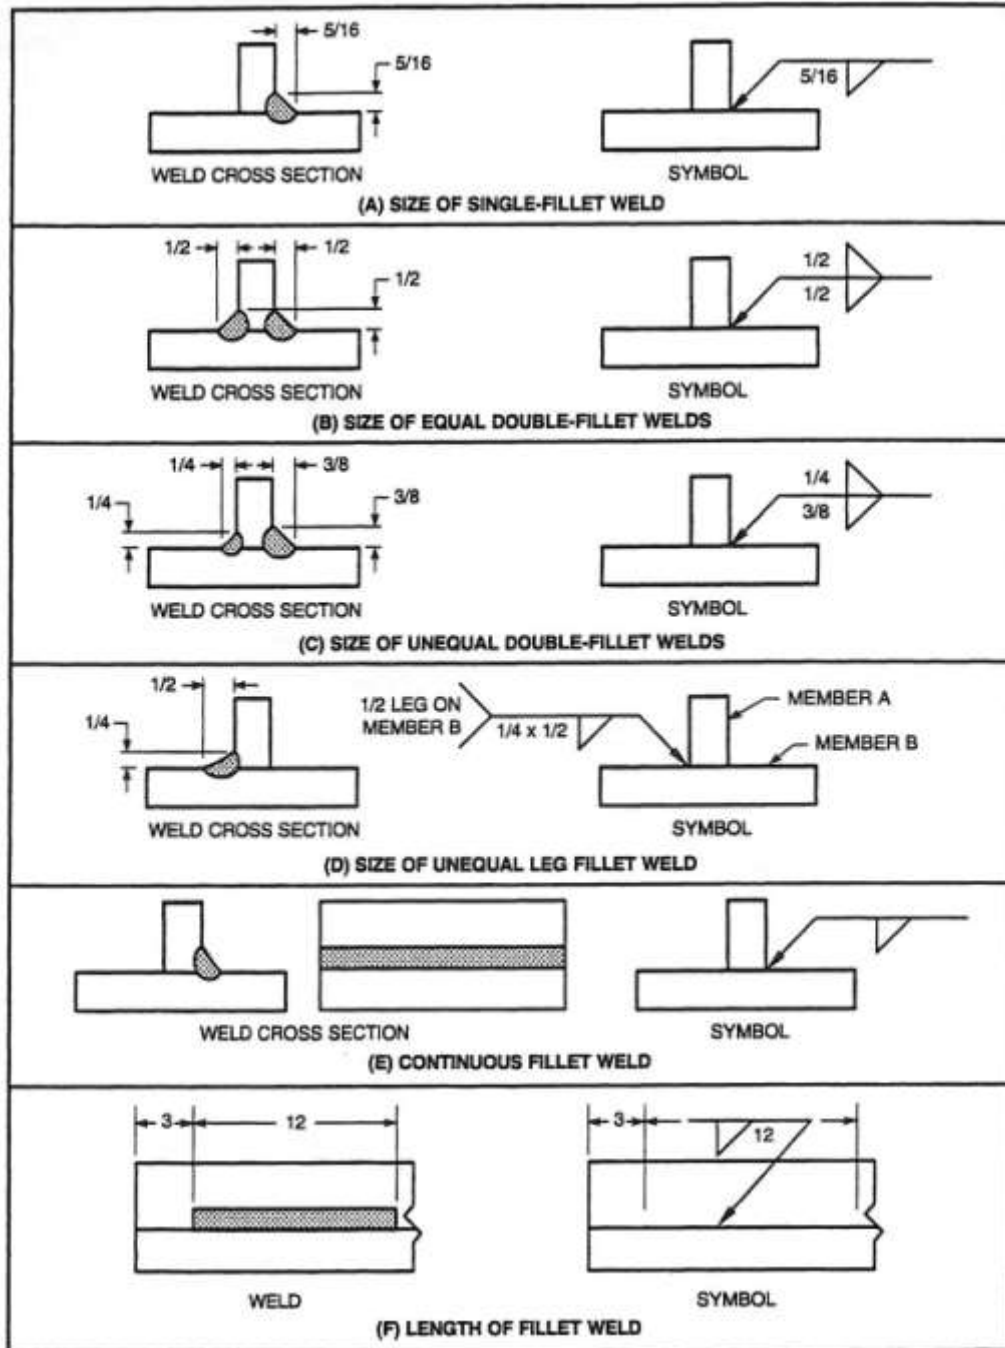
Specification of Size and Length of Fillet Welds
